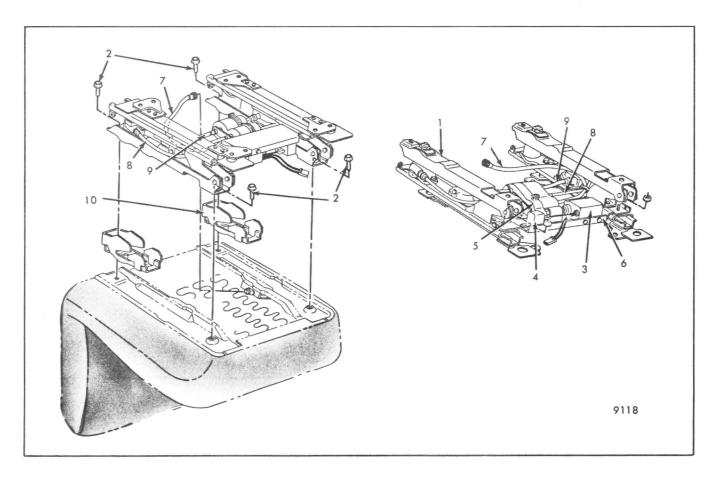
Power Operated Four-Way Seat Adjusters - Used Only on 50-50 Passenger Seat Equipped with Power Reclining Seat
